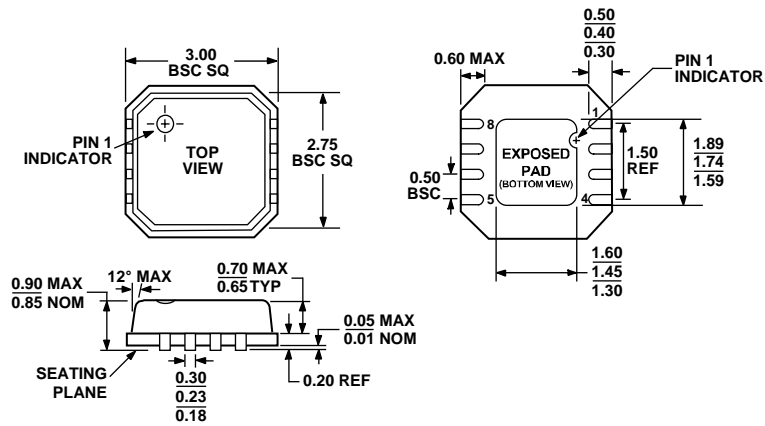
8-Lead Lead Frame Chip Scale Package [LFCSP_VD]
